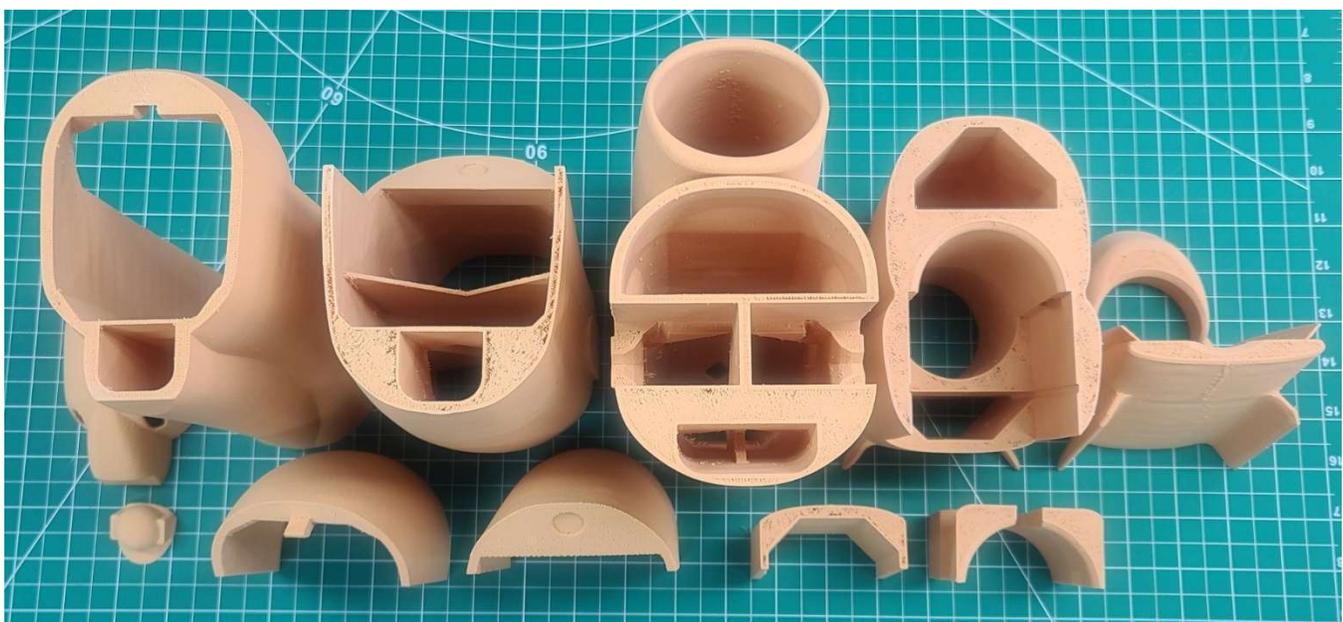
RQ-4 3D Printed Fuselage LW-PLA Parts
